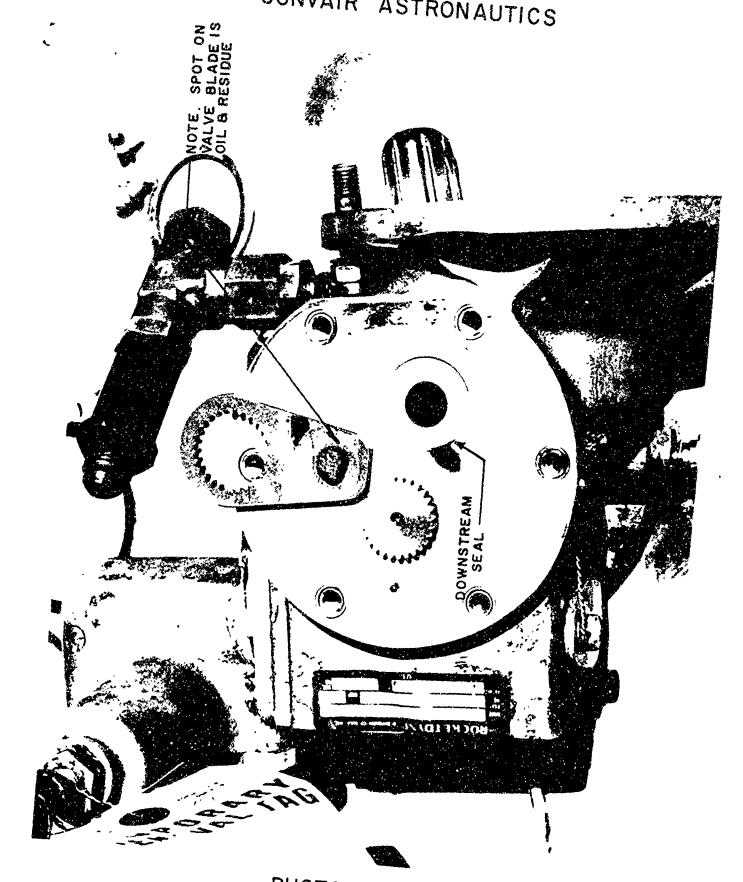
FUEL BLADE VALVE DOWNSTREAM SEAL WITH BLADE REMOVED AND TURNED OVER
